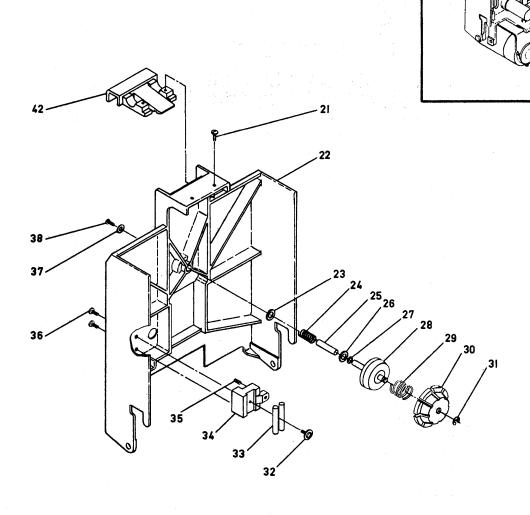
DISKETTE STORAGE DRIVE ASSEMBLY, 53 FD (SHEET 2 OF 2, INDEX NO. 21 THRU 42)
